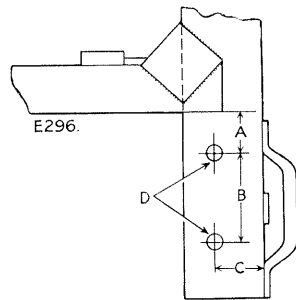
Position of holes on underside of rear cross-member, 109 models
